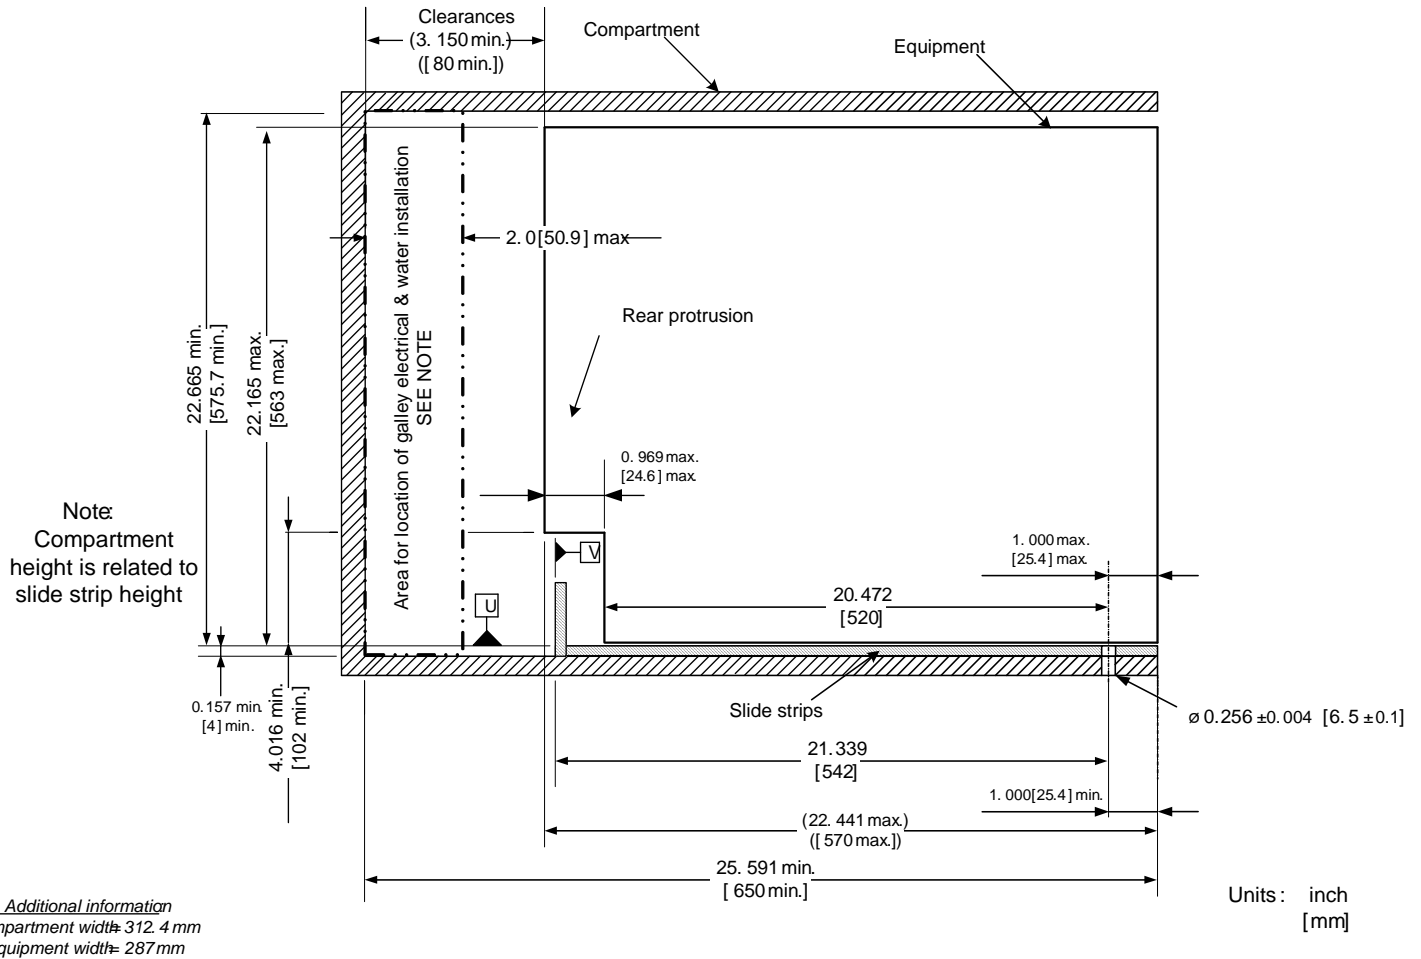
D – Size 2 GAIN Equipment Standard Dimensions Drawing – Installed Rear Views
